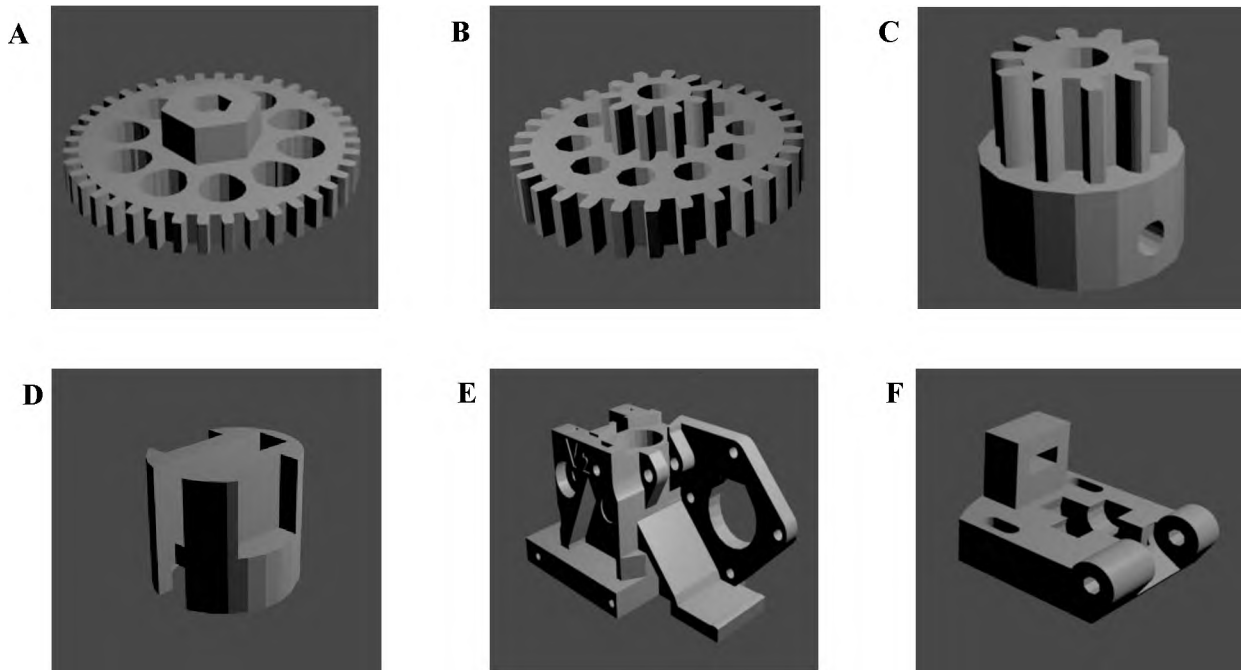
Three-dimensional (3D) printed parts required for universal paste extruder assembly. A: Large gear. B: Double gear. C: Drive gear. D: Syringe cap. E: Extruder body. F: Idler. Images were rendered in Blender (v2.78).
